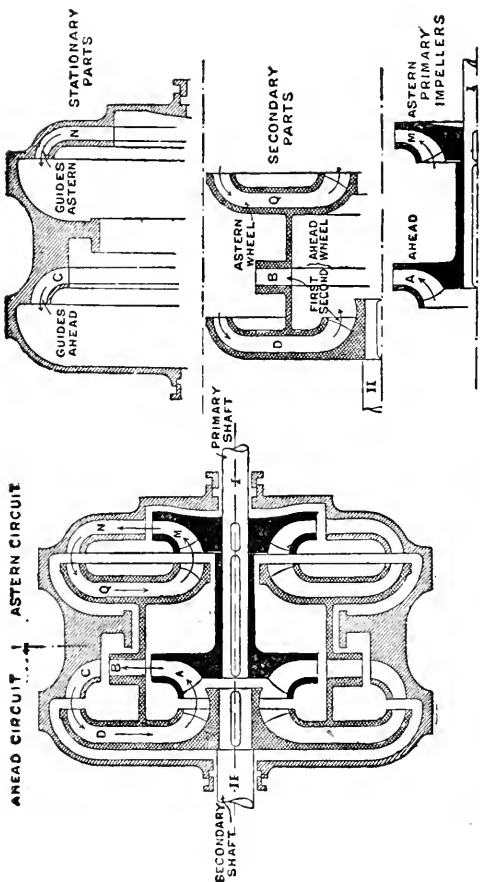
Diagram of the Principal Type of Hydraulic Transformer (Föttinger).
